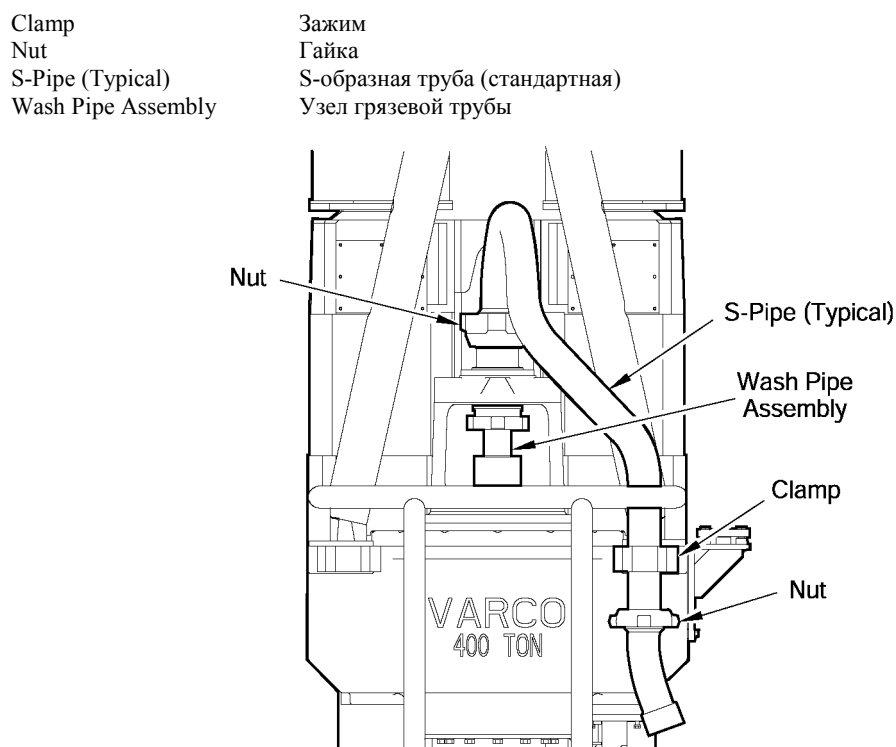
Disconnecting the S-pipe and wash pipe assembly
